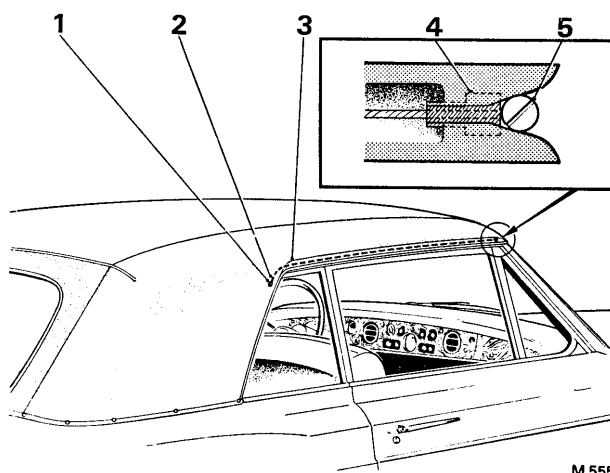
HOOD OUTER COVERING SIDE TENSION CABLE (Convertible Cars)
